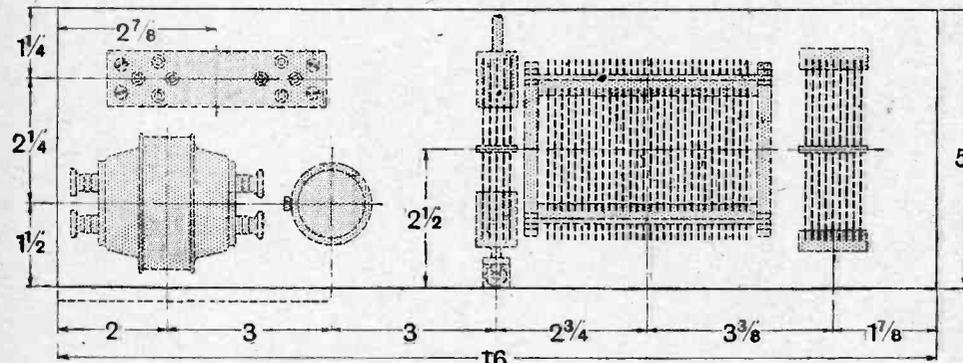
Relative position of components mounted on the base board. The valve panel is raised from the base board on wooden supports screwed to each end of the ebonite strip.
